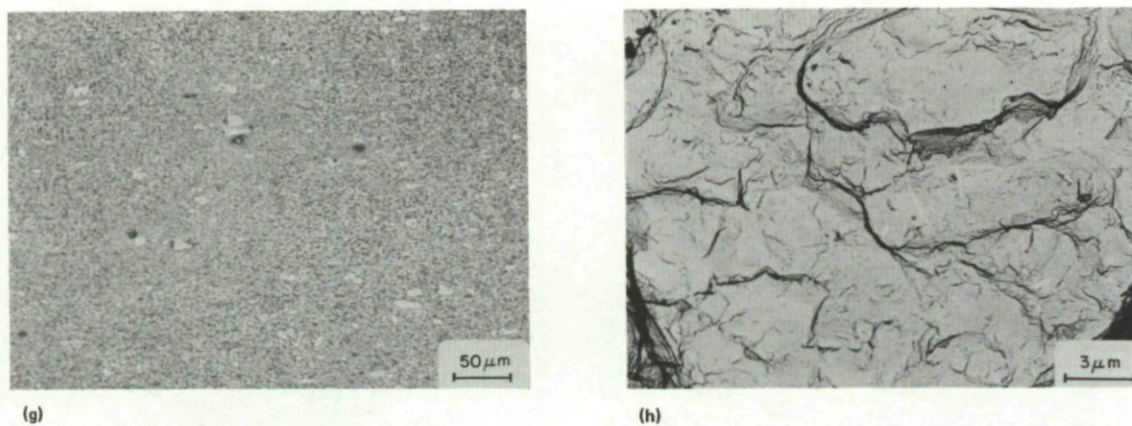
Pitting induced failure of some 440C stainless steel hinge bearings (Cont'd)
